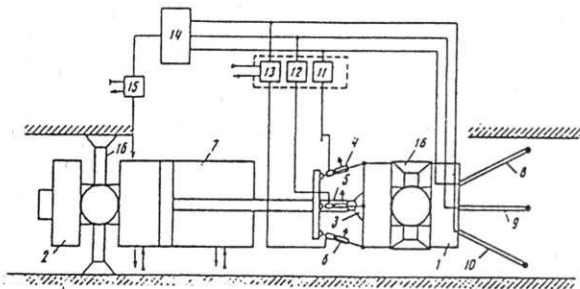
WCR design for travel within bent piping: (1) front support belt; (2) rear support belt; (3) hinge; (4),(5),(6) correction cylinders; (7) power cylinder; (8),(9),(10) sensors; (11),(12),(13) correction valves; (14) OR element; (15) power valve; (16) supports.
